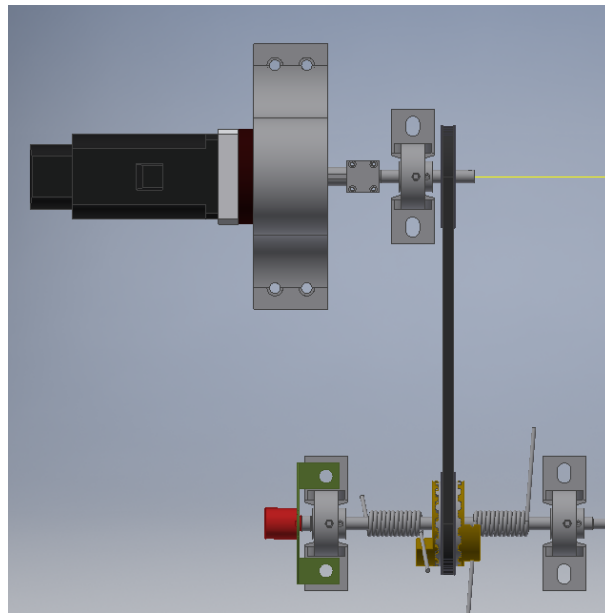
Top view of motor-bi-directional torsional spring shaft
